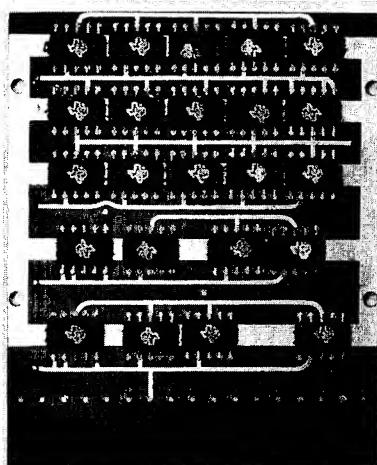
Encapsulator board with "Fusicon" pins for mounting of Texas Instruments "Semiconductor Networks" by resistance welding.
